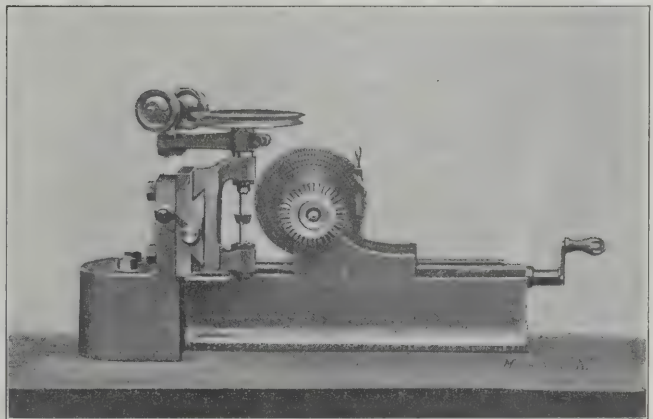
Cutter Forming Machine, Joseph Whitworth & Co. (1868)
